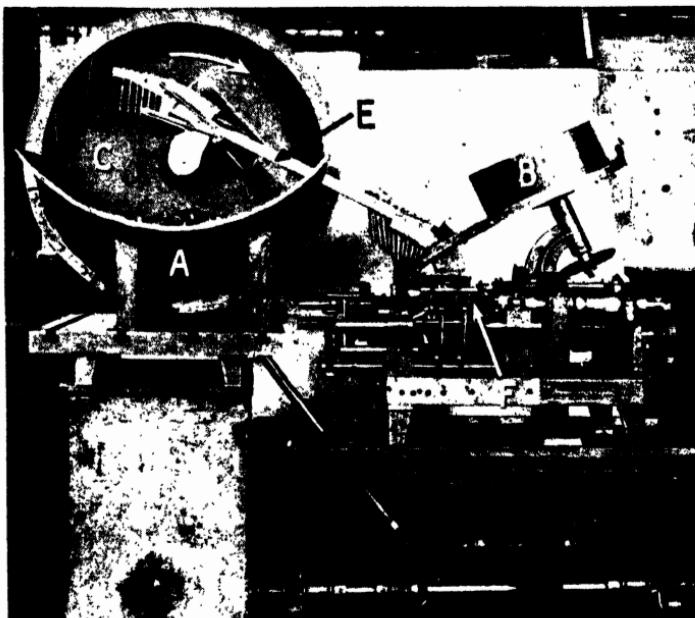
Automatic bolt-and-nut assembling machine. (*Courtesy of The Asa S. Cook Company.*)
